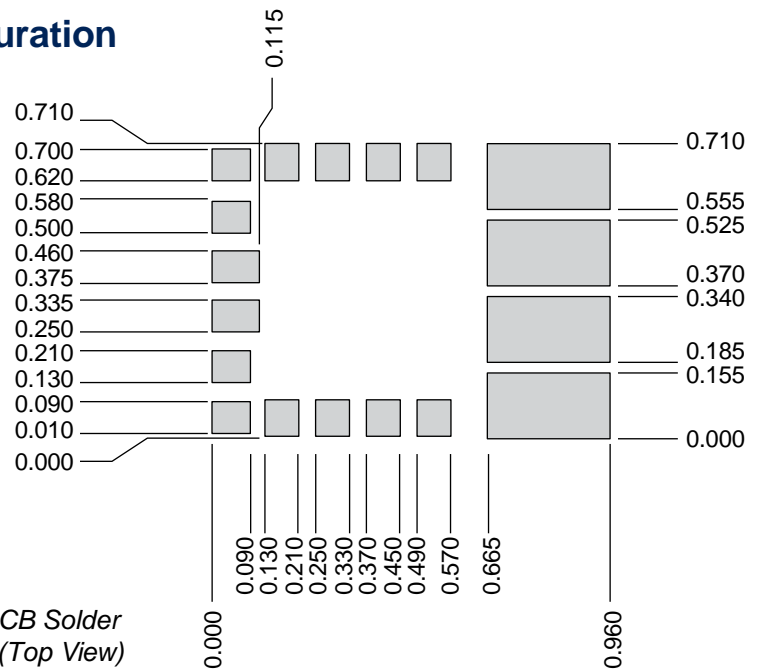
Recommended PCB Solder Pad Configuration (Top View)
